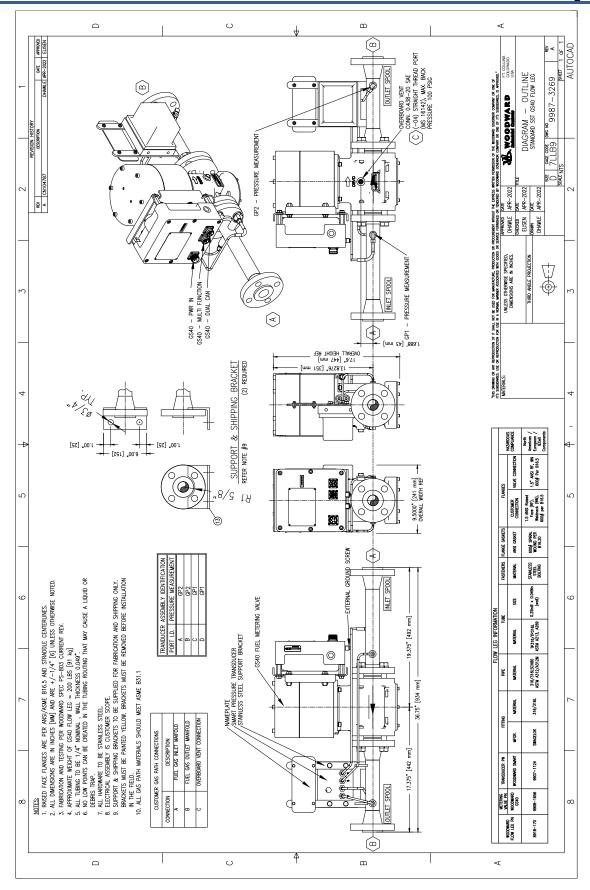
Installation Drawing of Standard GS40 Valve with Connectors
